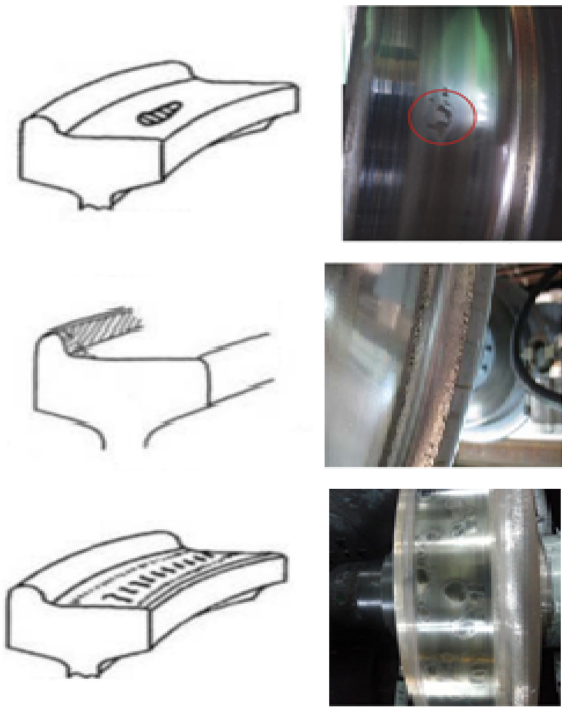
Failures of railway wheel tread (flat, flange wear, thermal crack)
